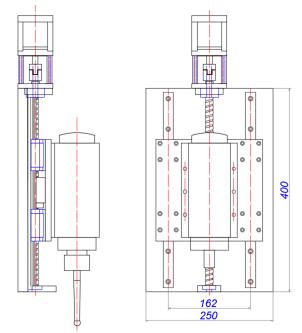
Diagram drive system of spindle of machine (moving in z vertical direction)
